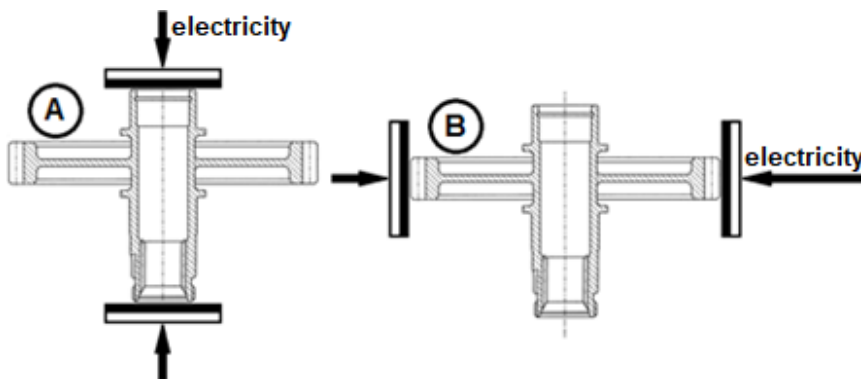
Diagram of a gear wheel examination by magnetic flaw detection in two perpendicular directions
